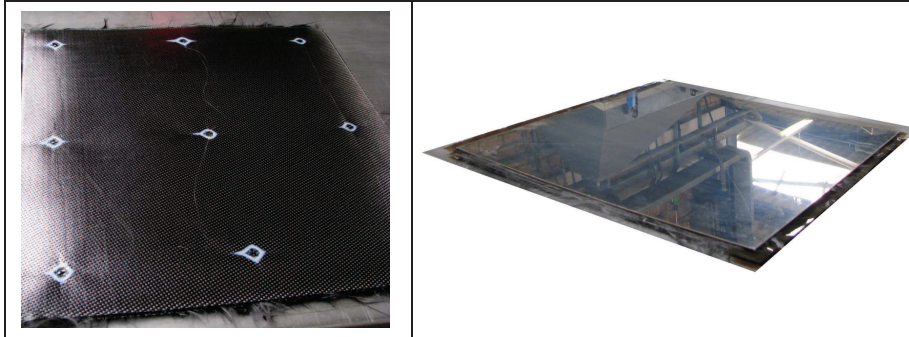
Stacked Cetex® layers, spot welded using an ultrasonic gun to melt the PPS local (left), laminate lay-up between two steel molds (right).
